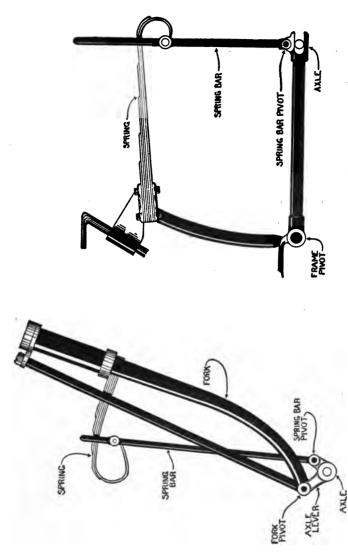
Motor-Cycle Suspension, with Leap Springs
